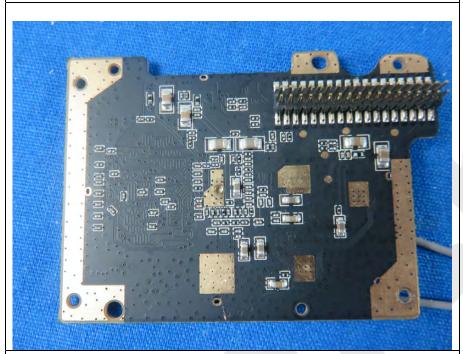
# Figure PCB of the EUT-Back View 3 6. Figure PCB of the EUT-Front View
